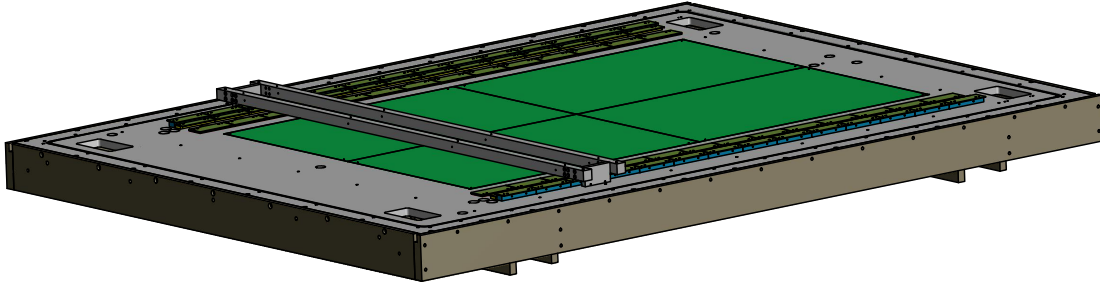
Schematic of wire plane removal fixture on upside-down top plate.
